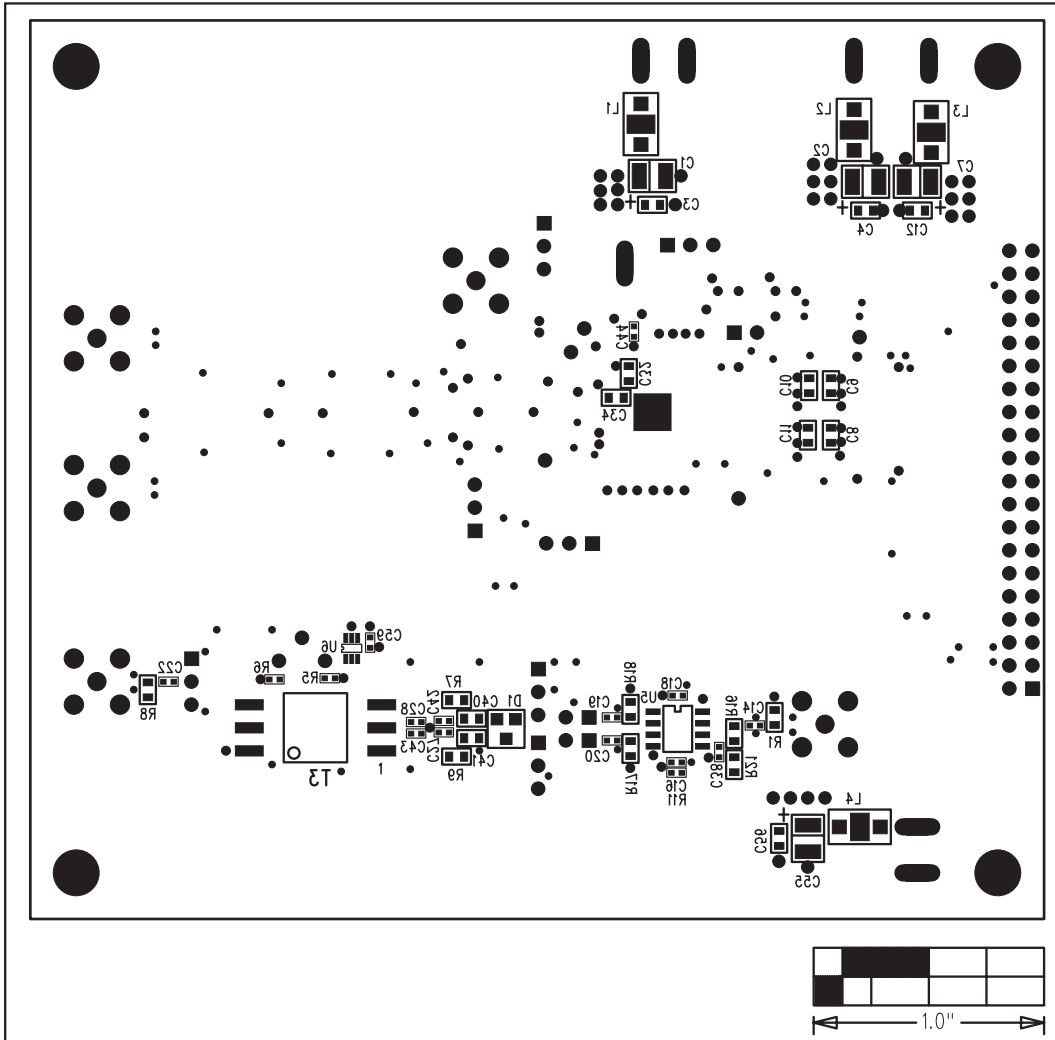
MAX1211 EV Kit Component Placement Guide—Solder Side
